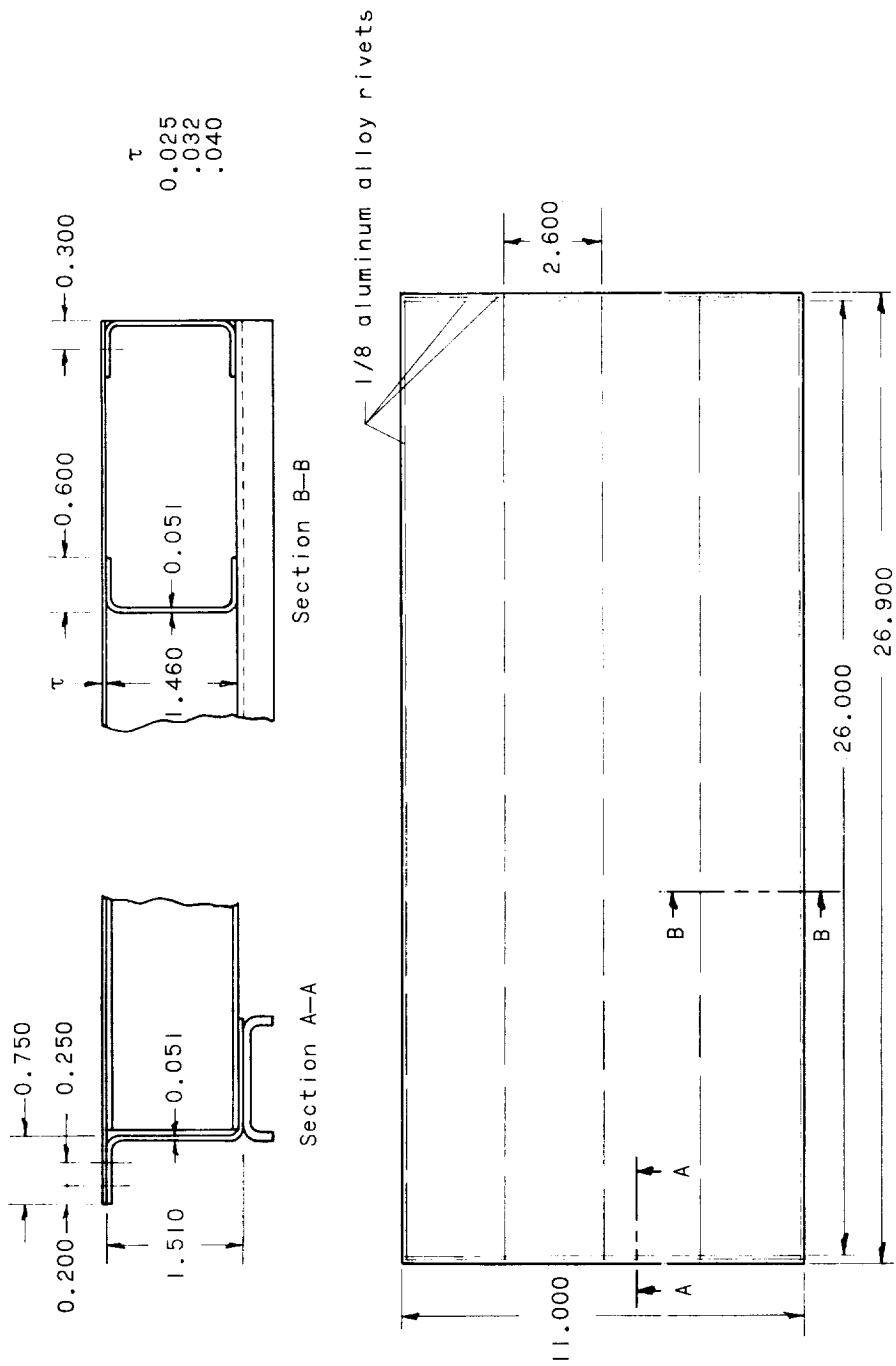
Panel construction details. Typical for all panels. All dimensions are in inches.
